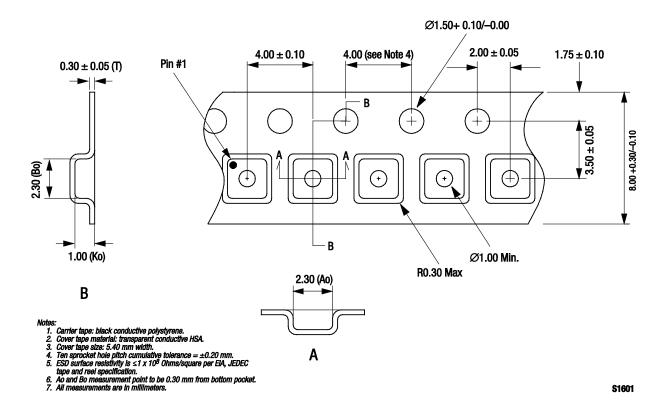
SKY67100-396LF Tape and Reel Dimensions
